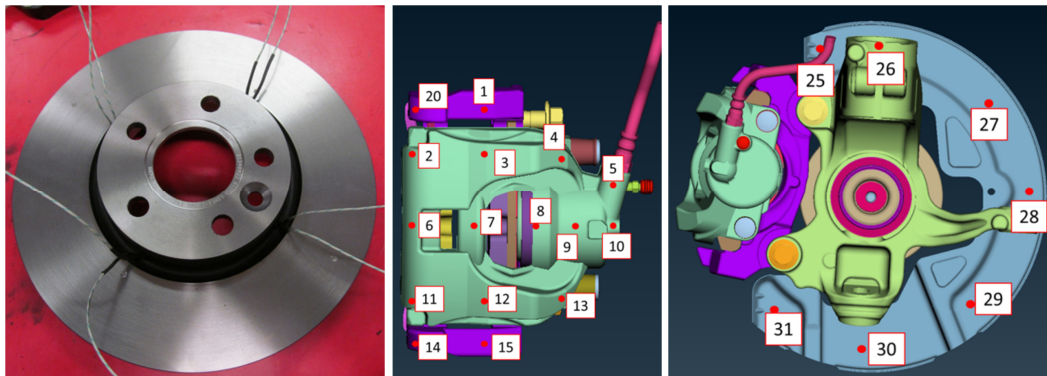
Brake disk equipped with thermocouples and an example of other thermocouples positions
